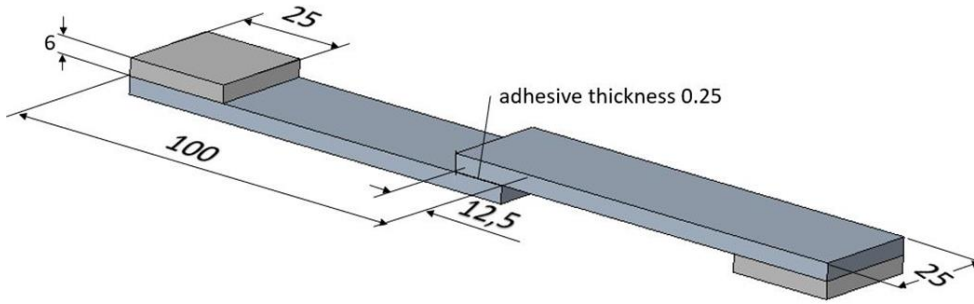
Single lap shear test specimen geometry, the dimensions are expressed in mm.
